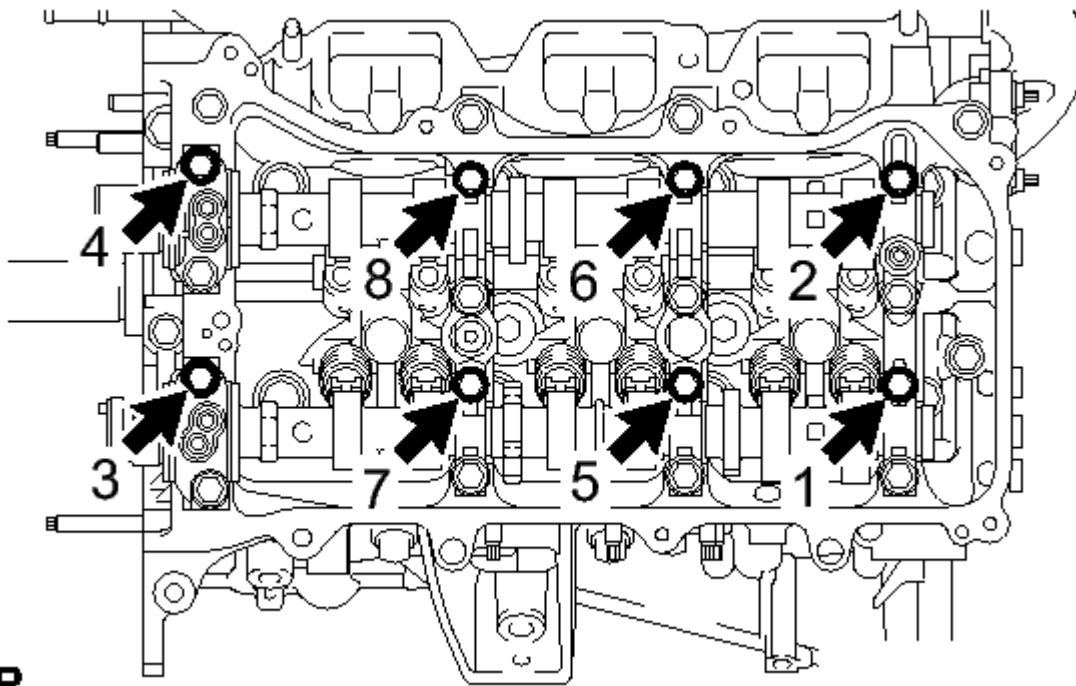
Identifying Camshaft Bearing Cap (Bank 2)
